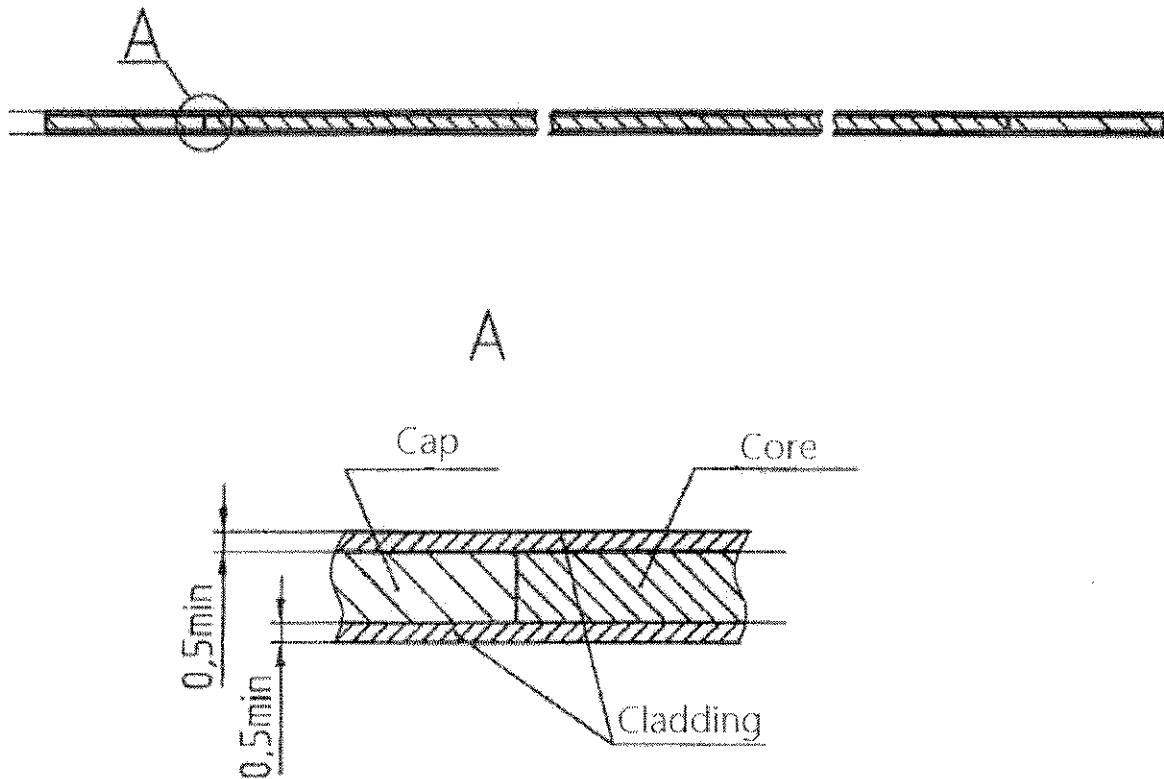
General drawing of LEU Target Plate (not in scale, dimensions in mm).
